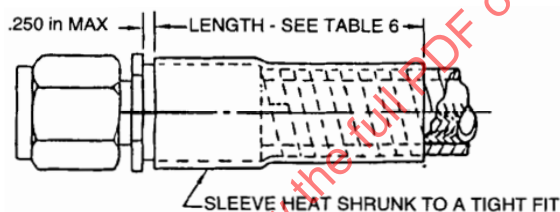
SPIRAL AND POLYESTER ABRASION COVER /7/, /8/
